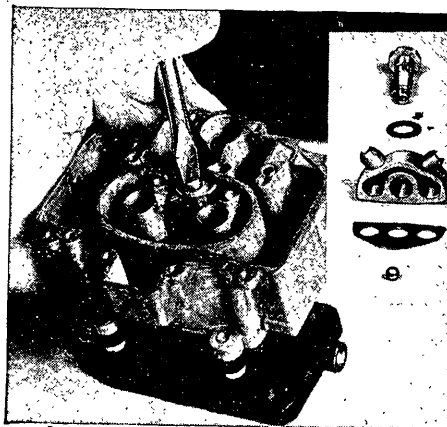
Remove pump discharge nozzle screw, nozzle and gasket. Place hand on top of main body and invert body to catch check ball. Scrap gaskets
